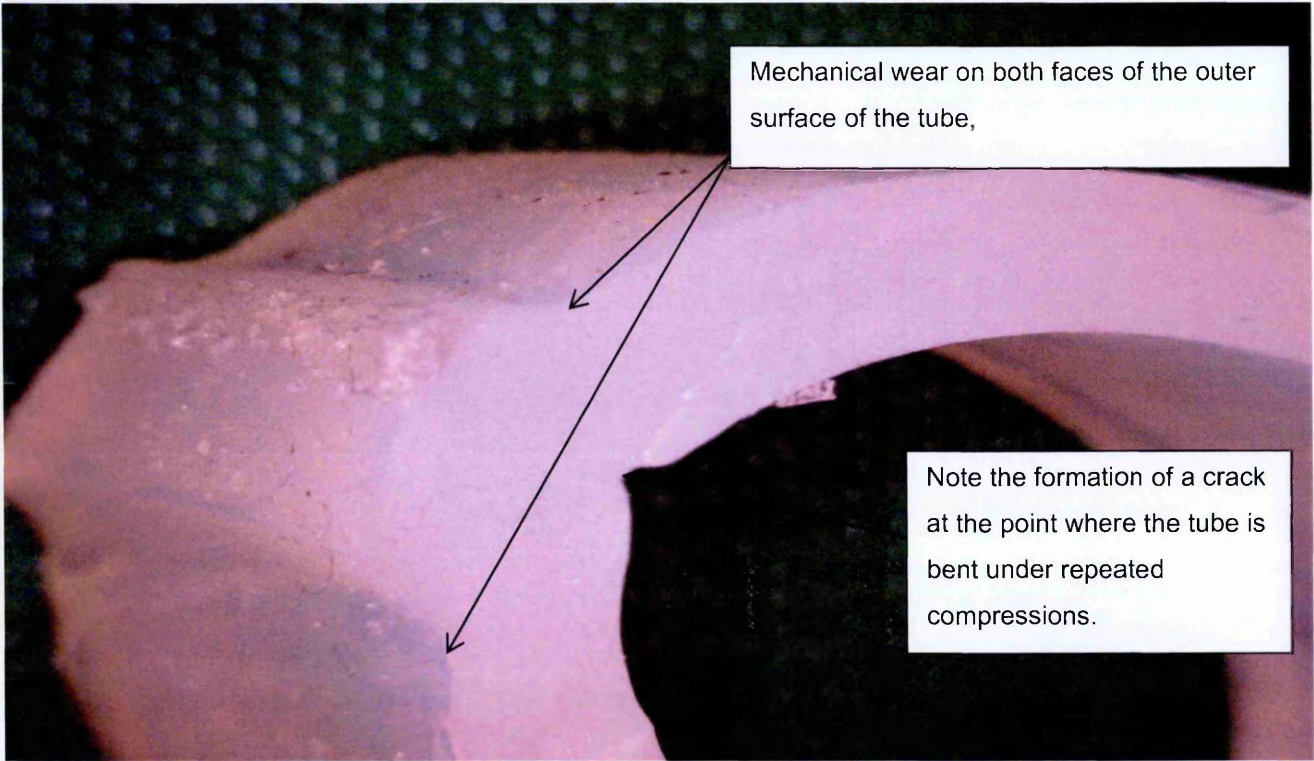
Section 1 through a silicone rubber tube showing damage due to mechanical wear
